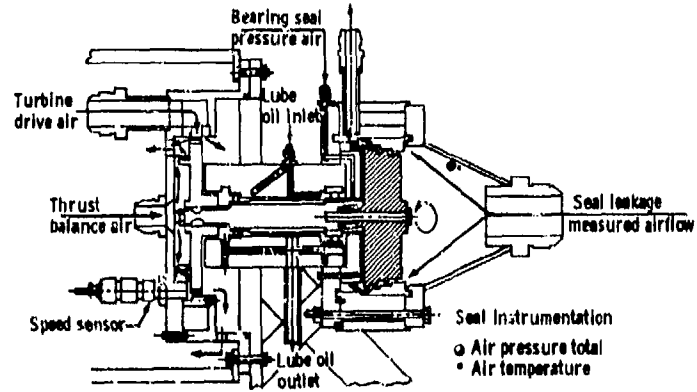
SKETCH OF THREE-DIMENSIONAL AIR SEAL TEST RIG
